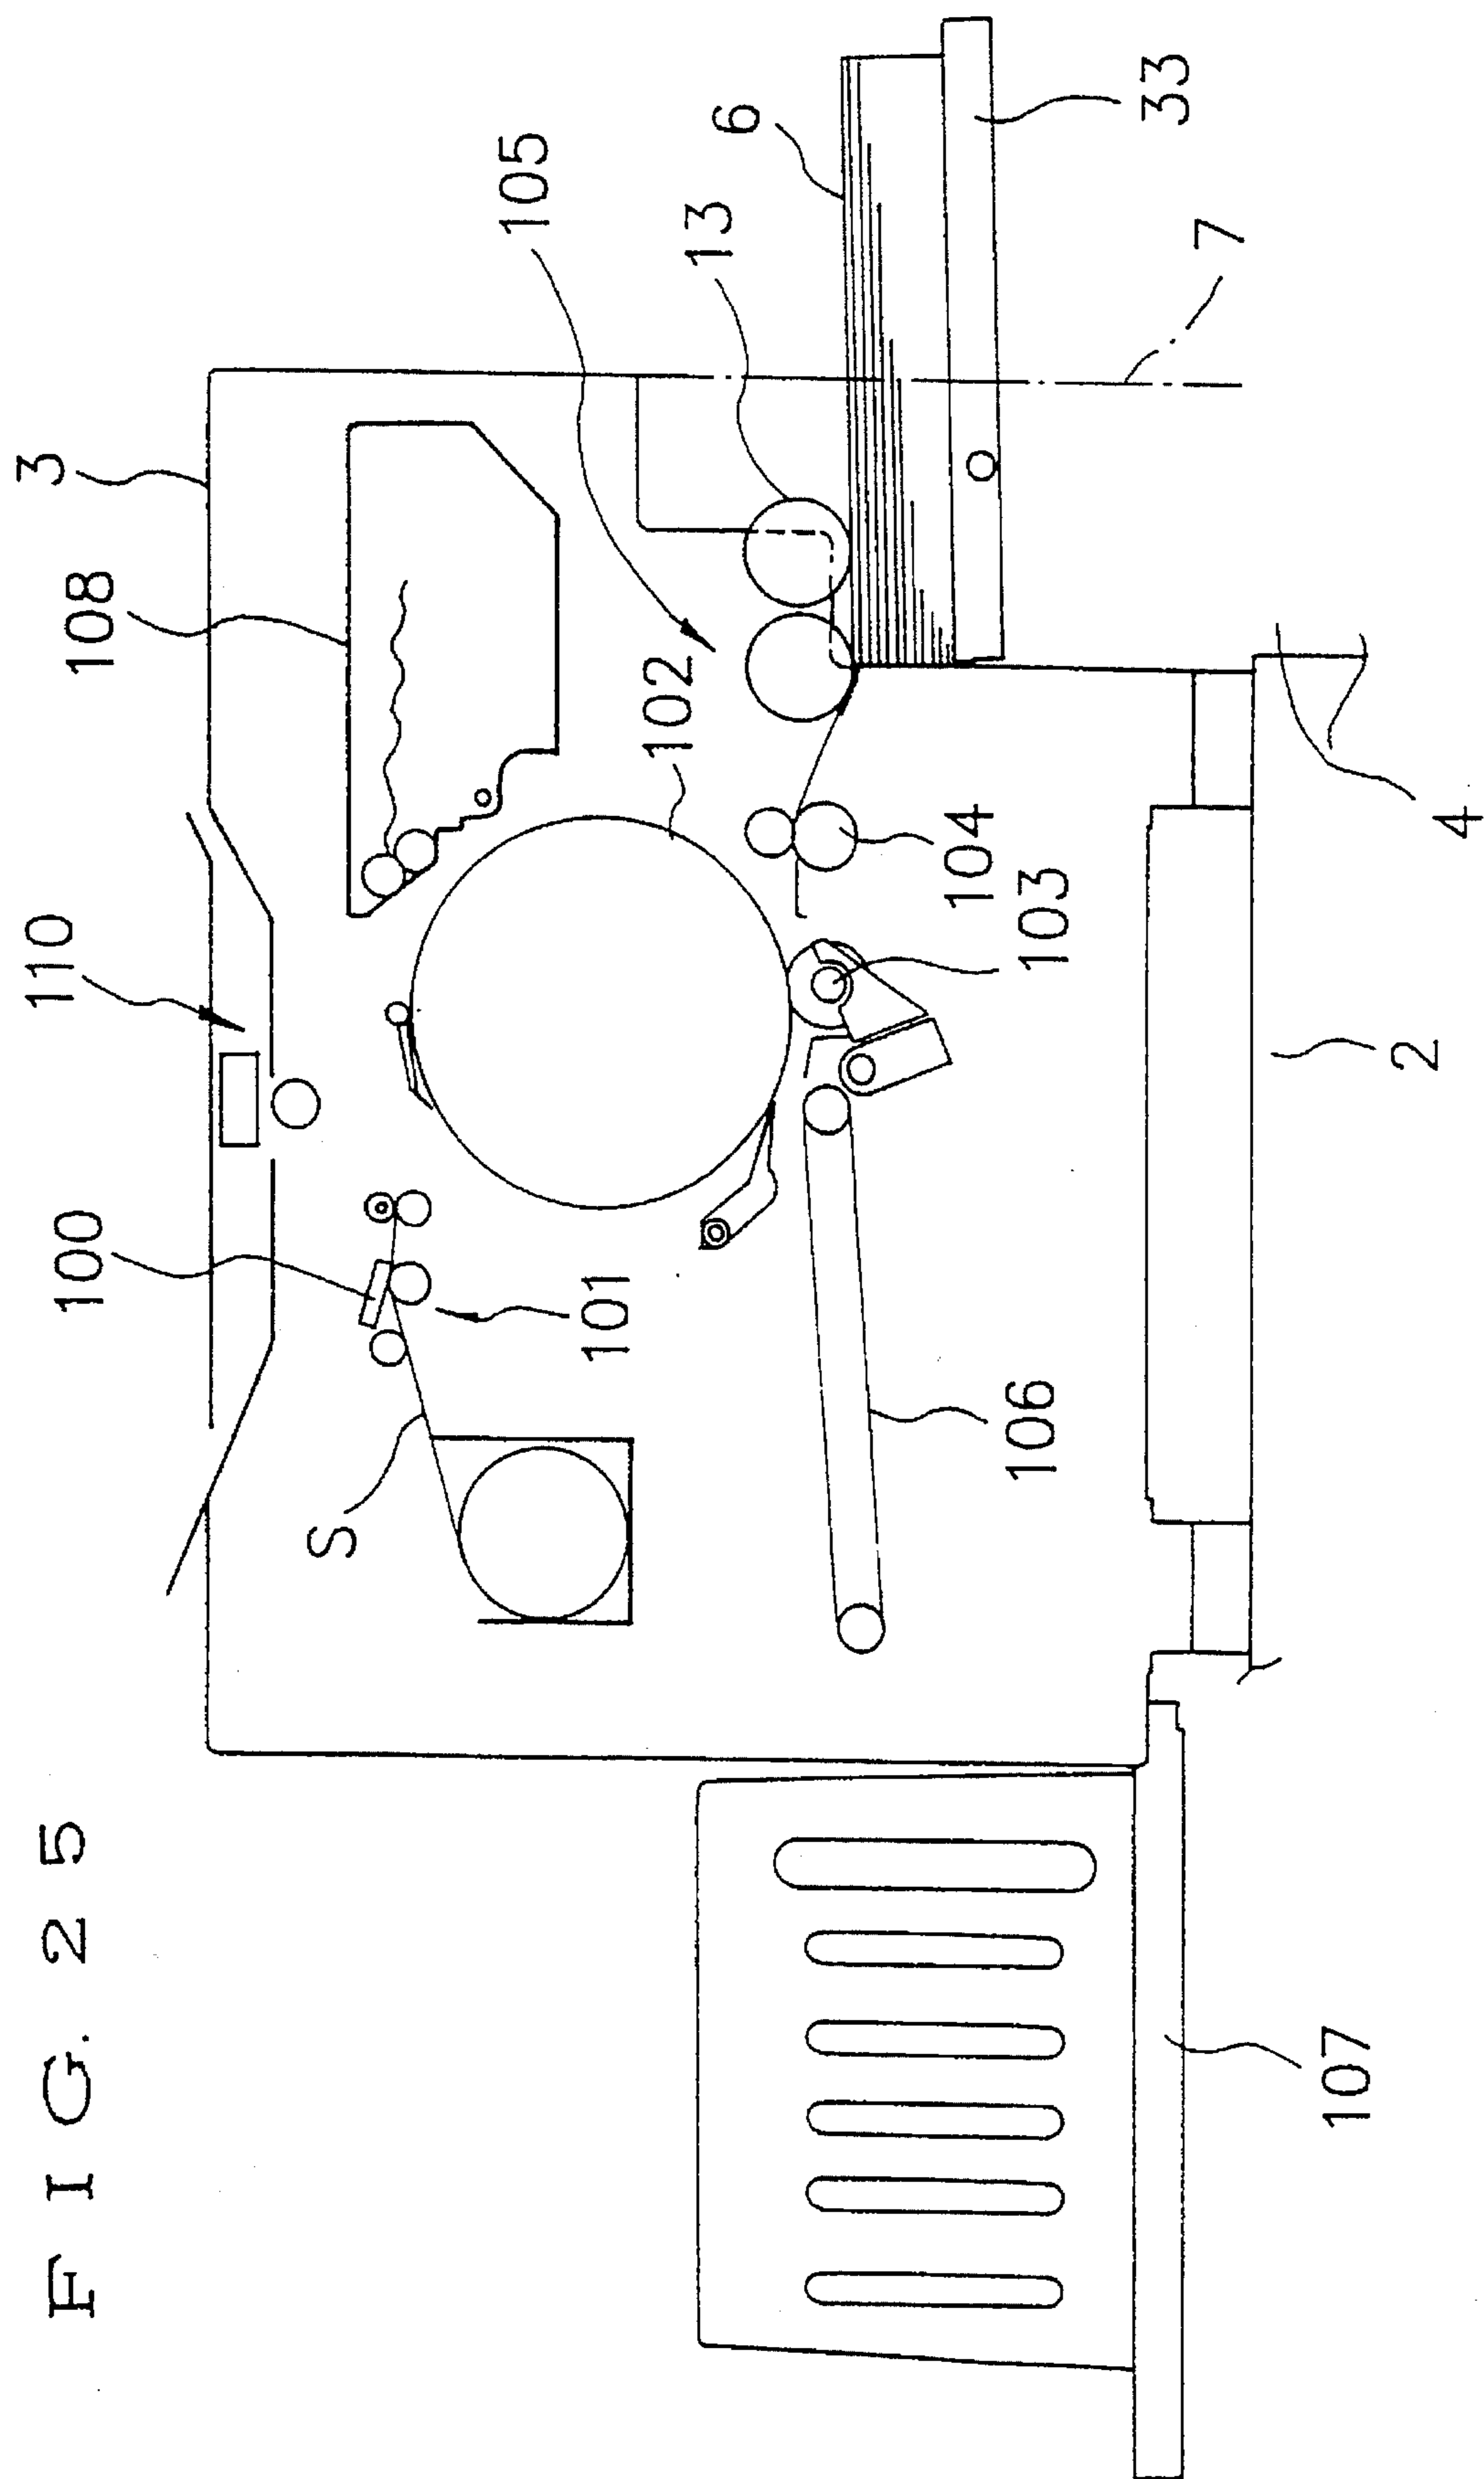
IMAGE FORMING APPARATUS AND SHEET FEED UNIT
